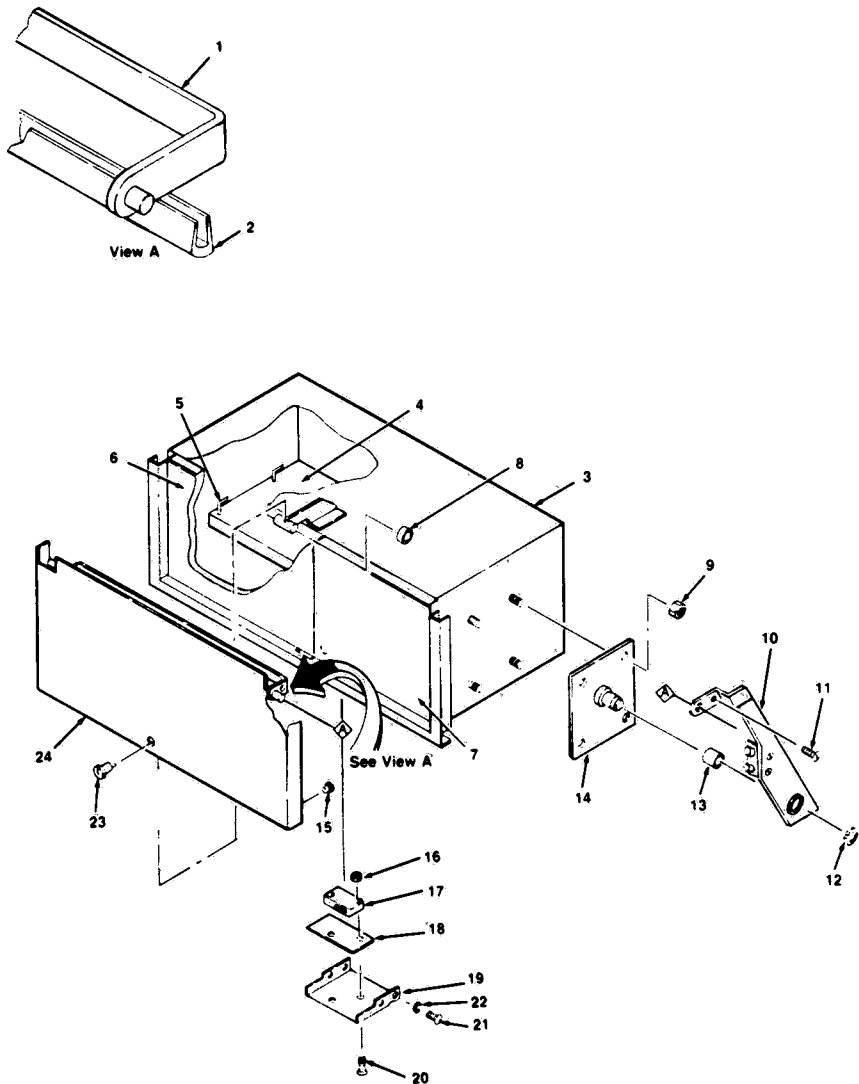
NARCOTIC CABINET ASSEMBLY.
